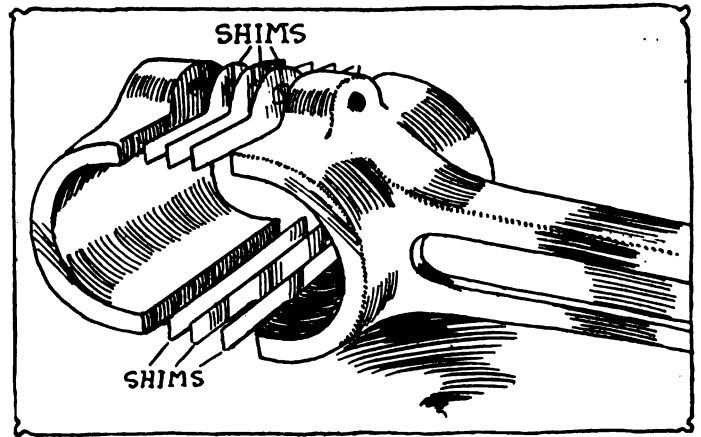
Connecting-rod bearing end with cap removed to show shims
